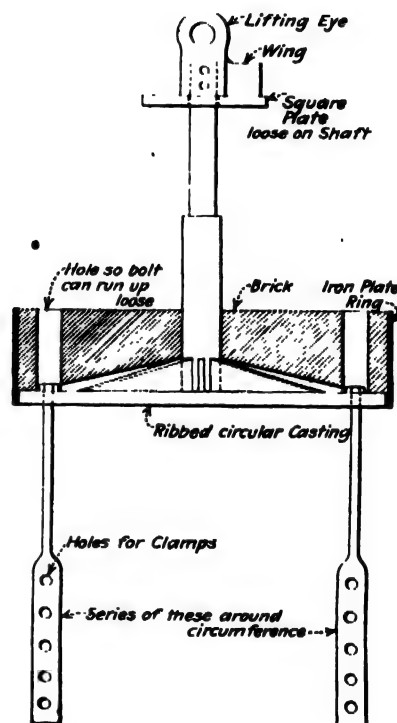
SKETCH OF FORGINGS SUPPORTING SPIDER
